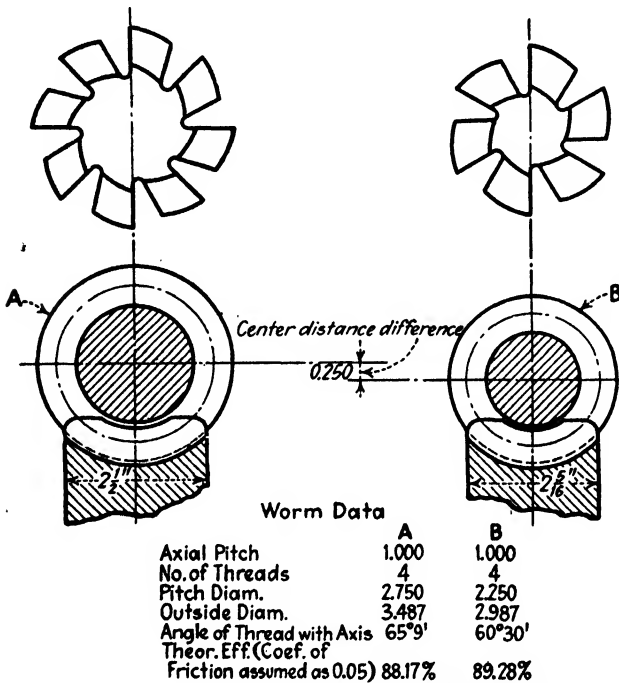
Small worm diameters should be avoided as they impair tooth contact and increase cost of cutting.
